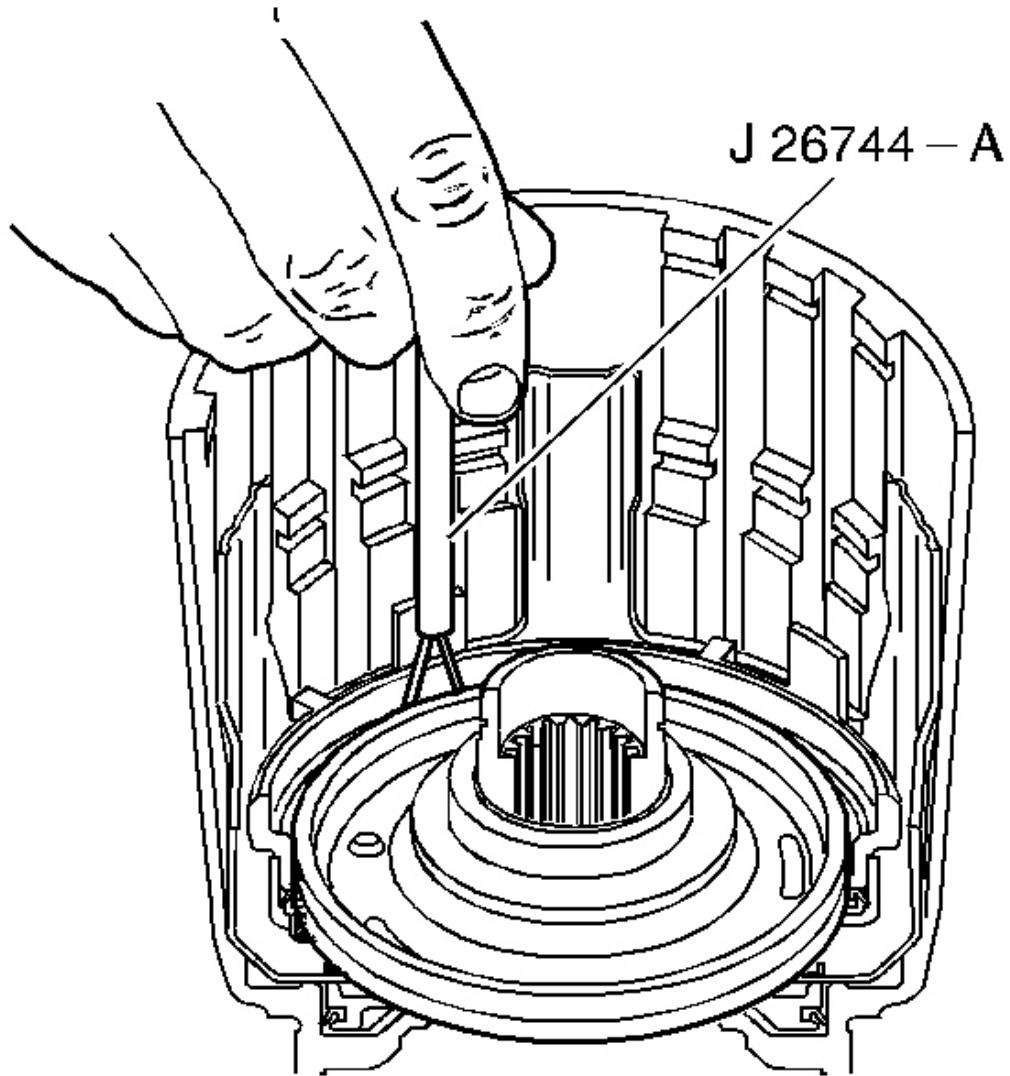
Installing Overrun Clutch Piston Outer Seal With J 26744-A
